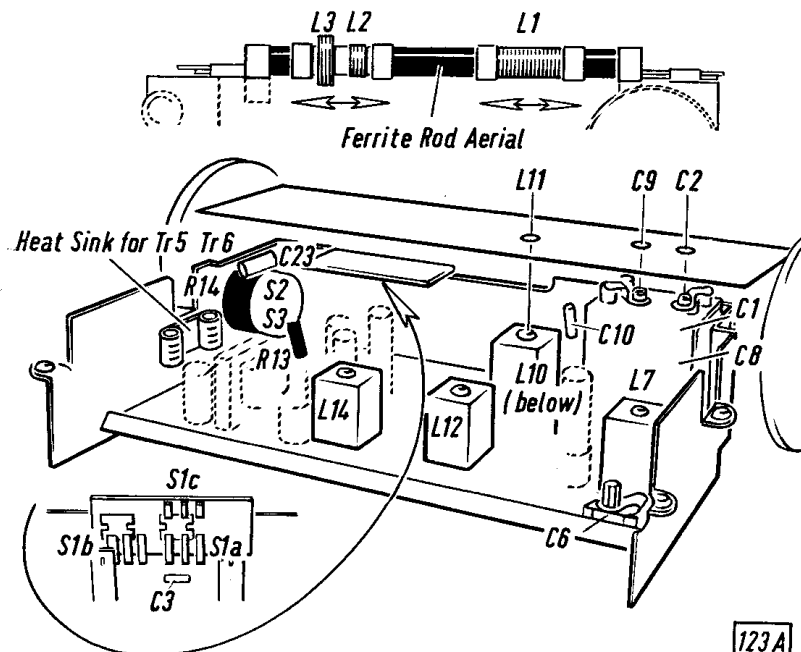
(left). View of receiver chassis showing components not mounted on the printed board and, in addition, the locations of trimmers and coil adjustments used in alignment. TR5 and TR6 are mounted in a spring clip secured to the side chassis member. This clip functions as a heat sink. The transistors are also coated with silicone grease to ensure effective heat transfer.
